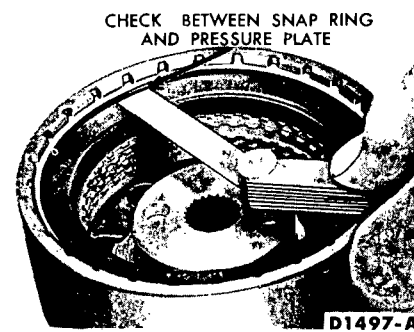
Checking Forward Clutch Snap Ring Clearance
